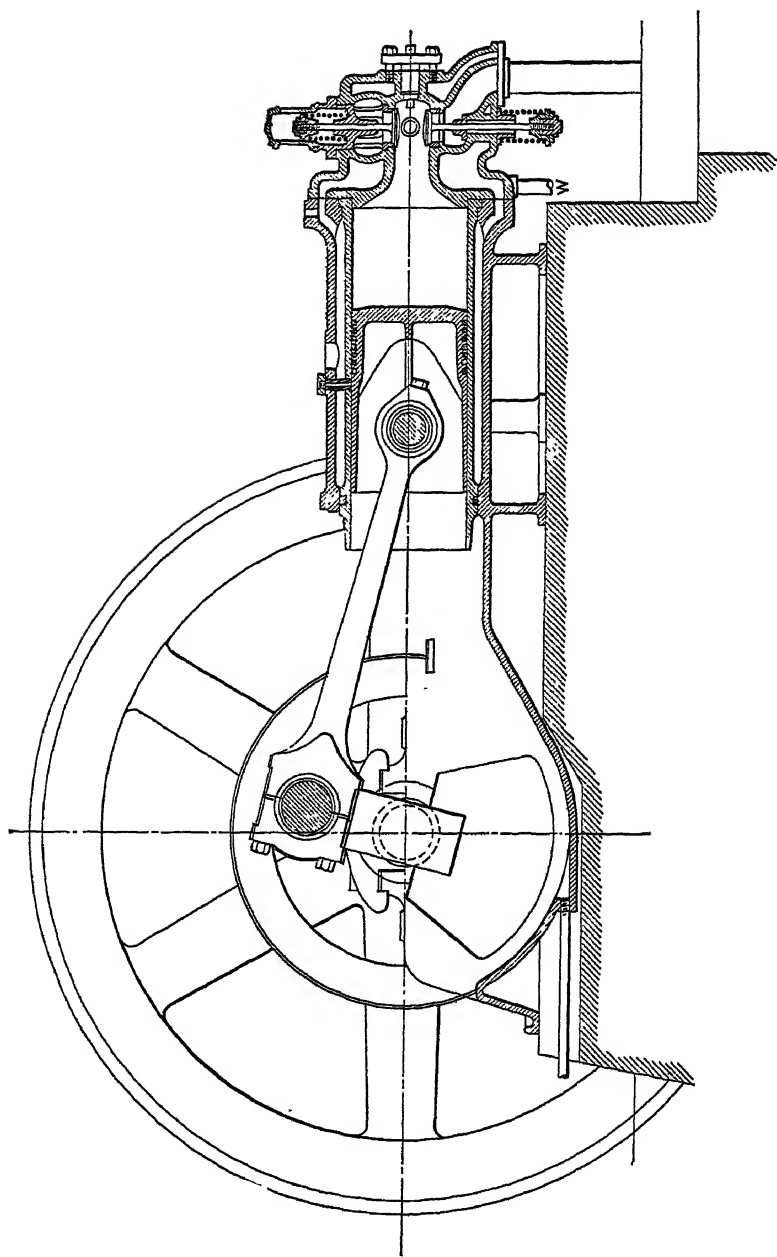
Four-Cycle Single-Acting Gas-Engine. Section.
